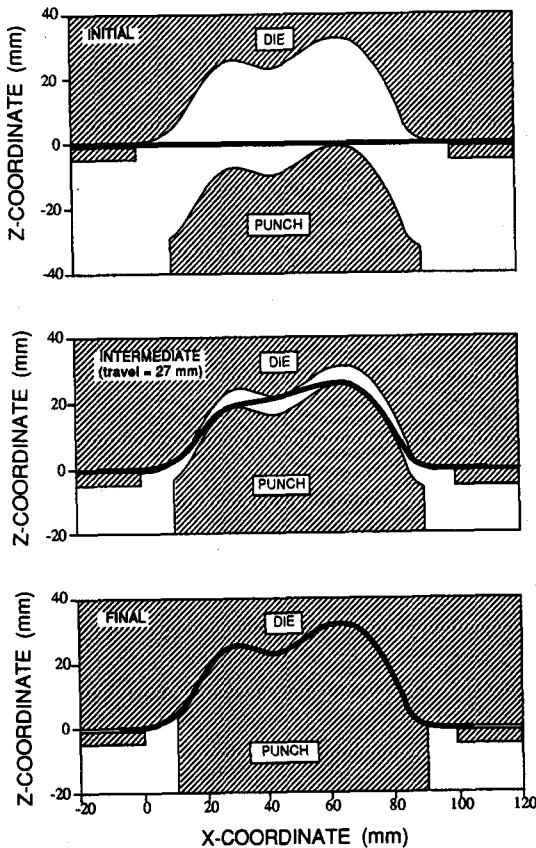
Tooling and deformed geometries of a reverse drawing section.
